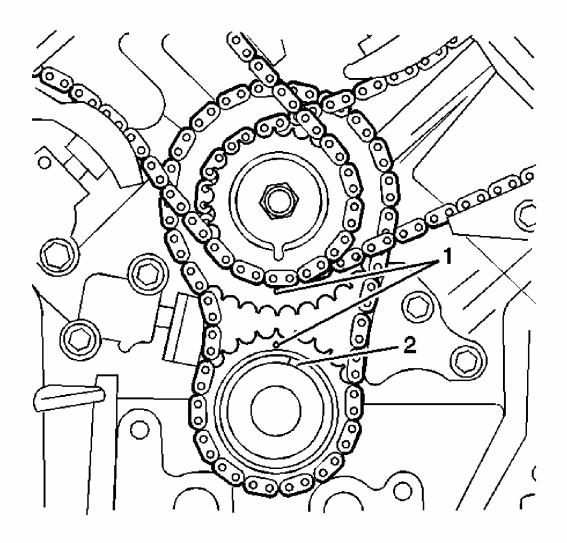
Identifying Primary Timing Gear Alignment Marks Courtesy of GENERAL MOTORS CORP.
